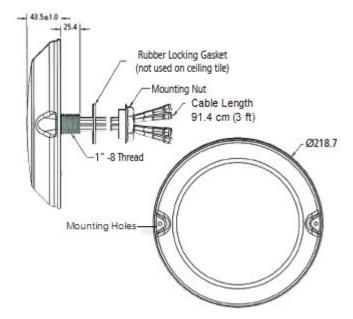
WS-AI-DX02360 Mounting Post and Mounting Nut
